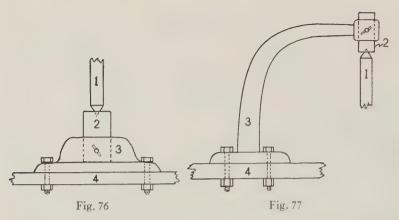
Detail of Lower Bearing For Lap. 1, spindle; 2, lignum-vitae bearing; 3, adjustable socket; 4, cross bar. Figure 77. Detail of Upper Bearing for Lap. 1, spindle; 2, lignum-vitae bearing; 3, bearing arm; 4, table top.
